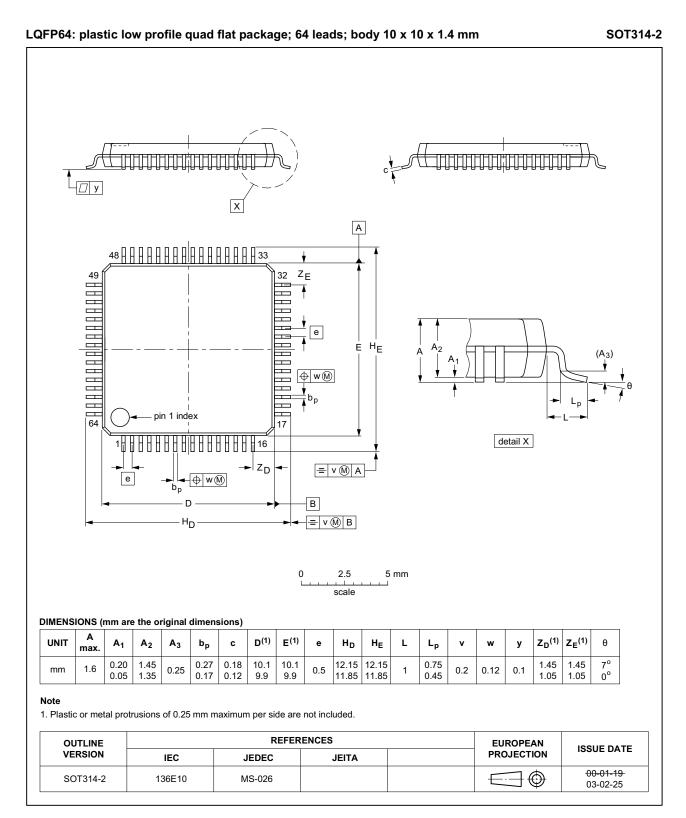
Package outline SOT314-2 (LQFP64) of PCF8576CHL/1
